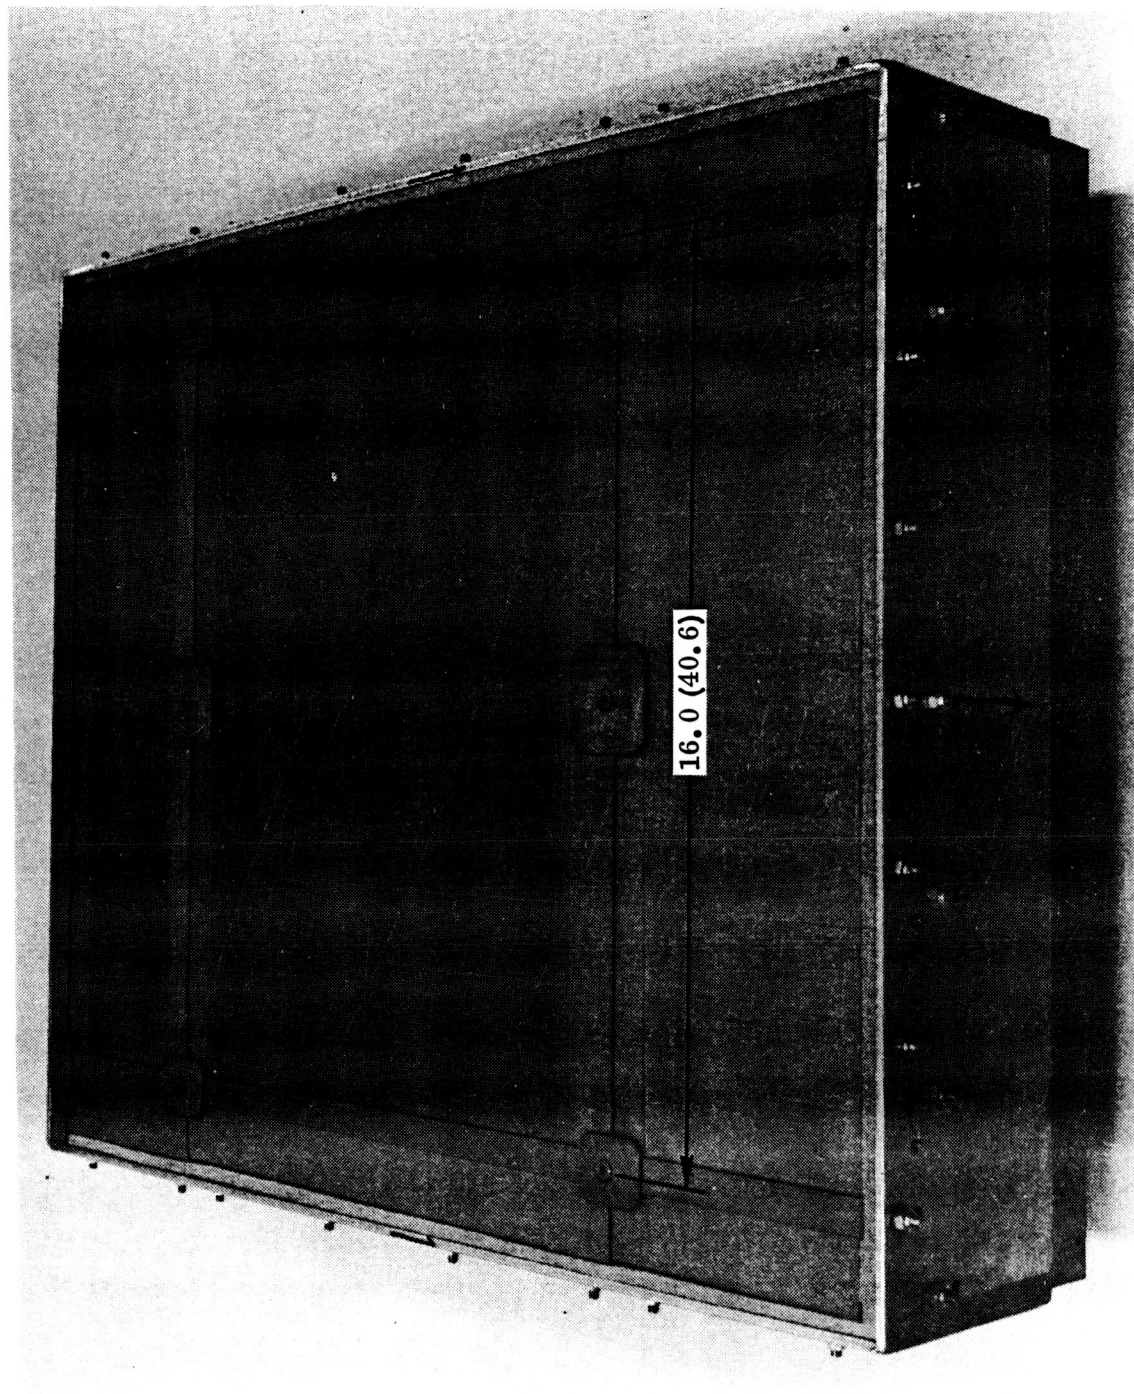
Tee-Stiffened TPS Specimen Before Thermal Cycling — View Looking Upstream (Photo 130838B)
